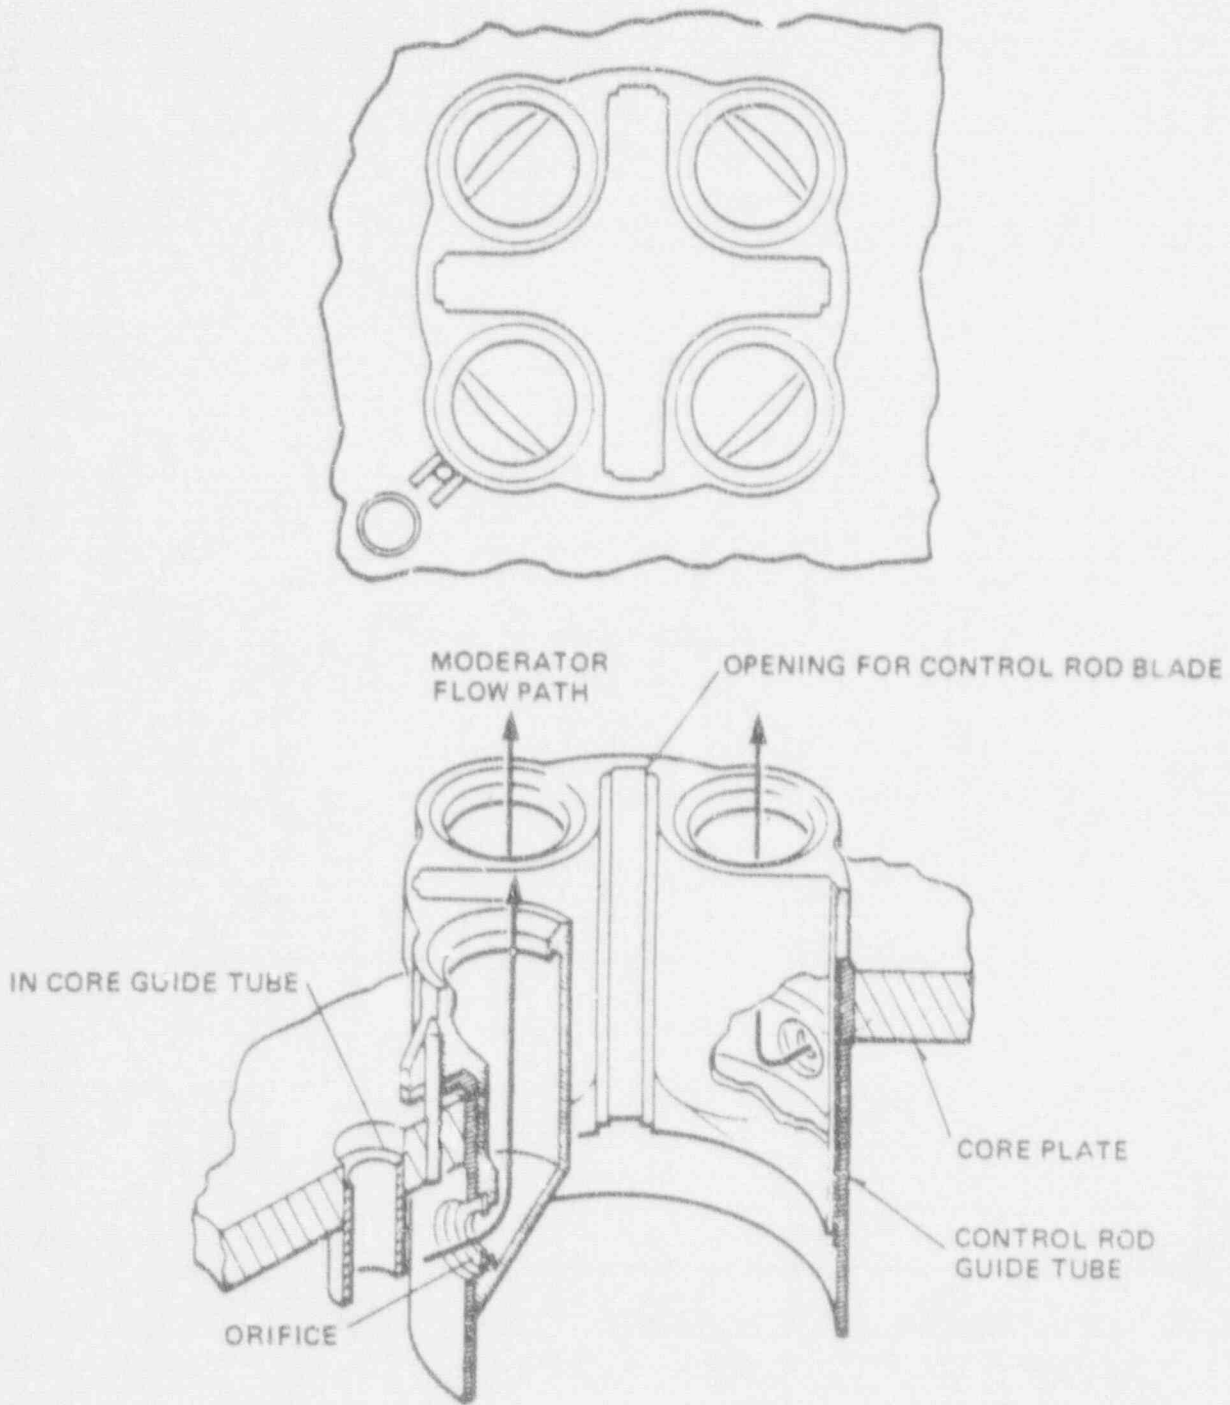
Arrangement of a fuel support piece and coolant flow paths from the vessel lower plenum into the four fuel assemblies that it supports.
